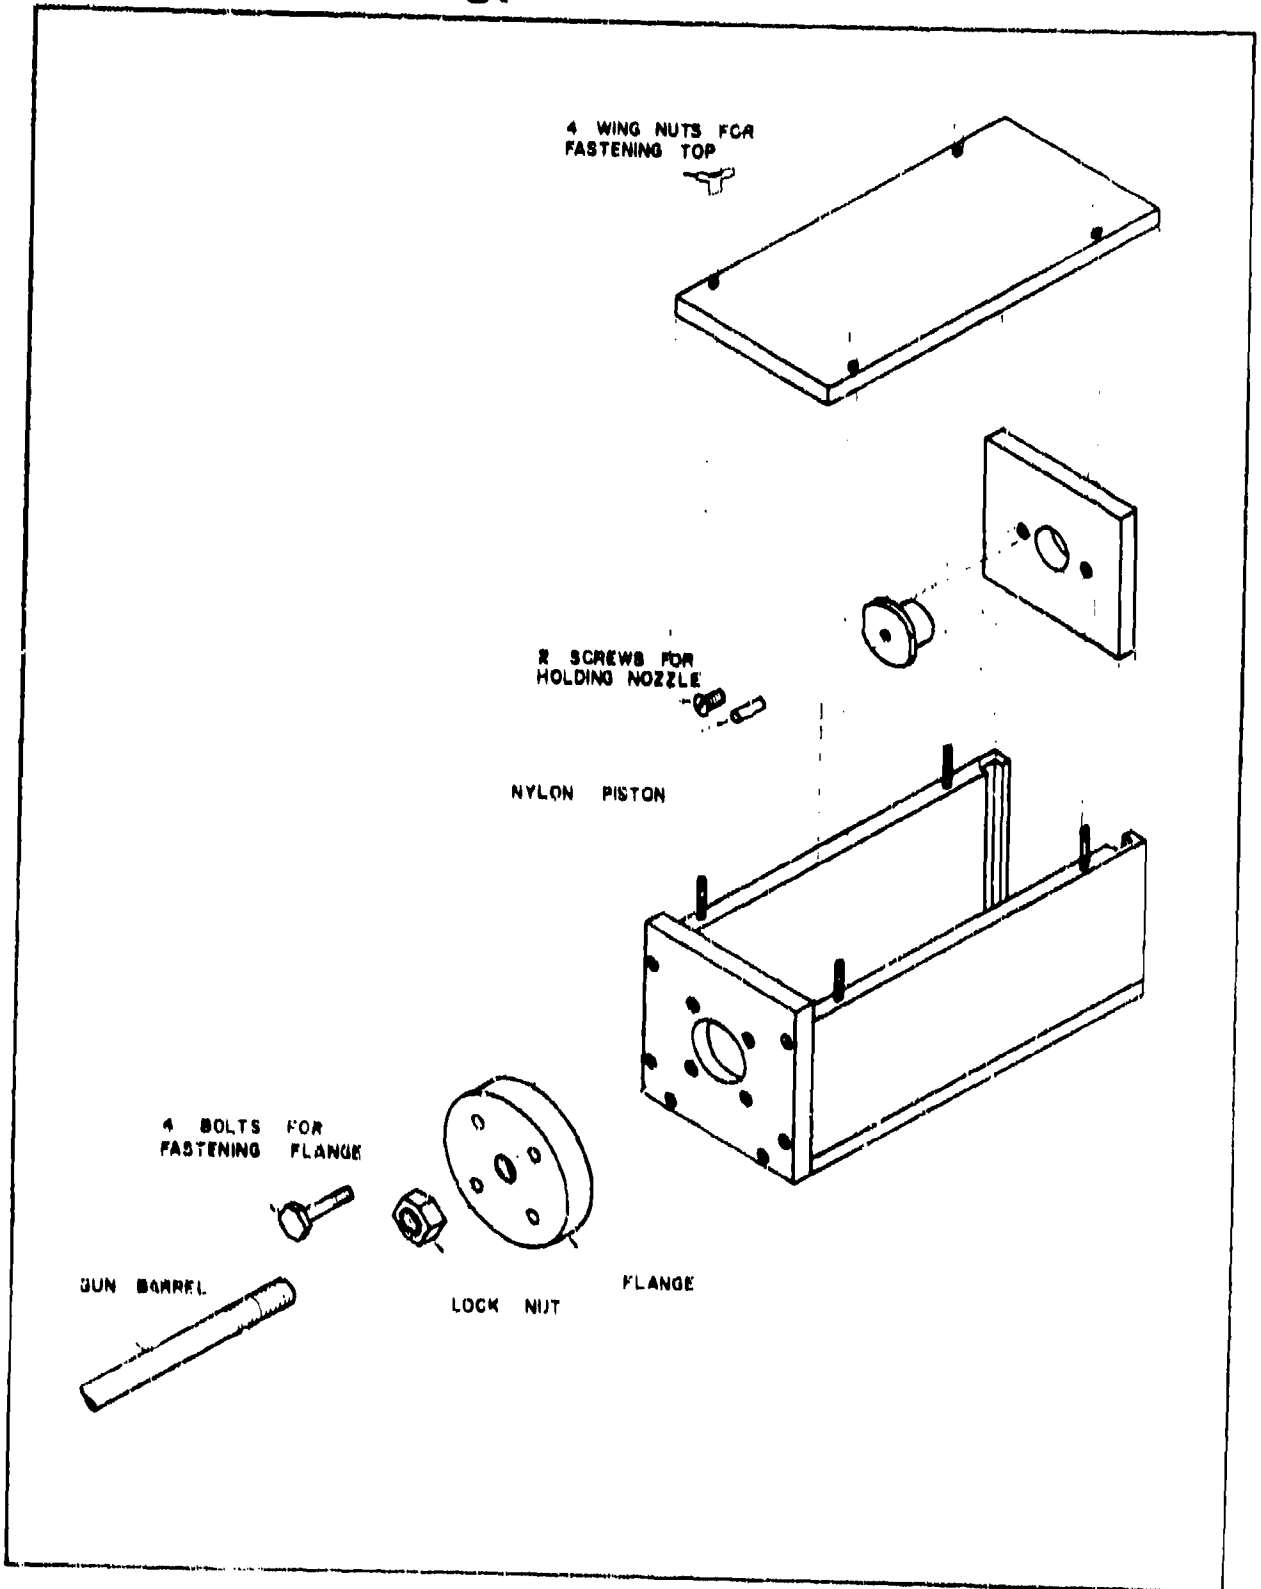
EXPLODED VIEW OF JET ACCELERATOR
